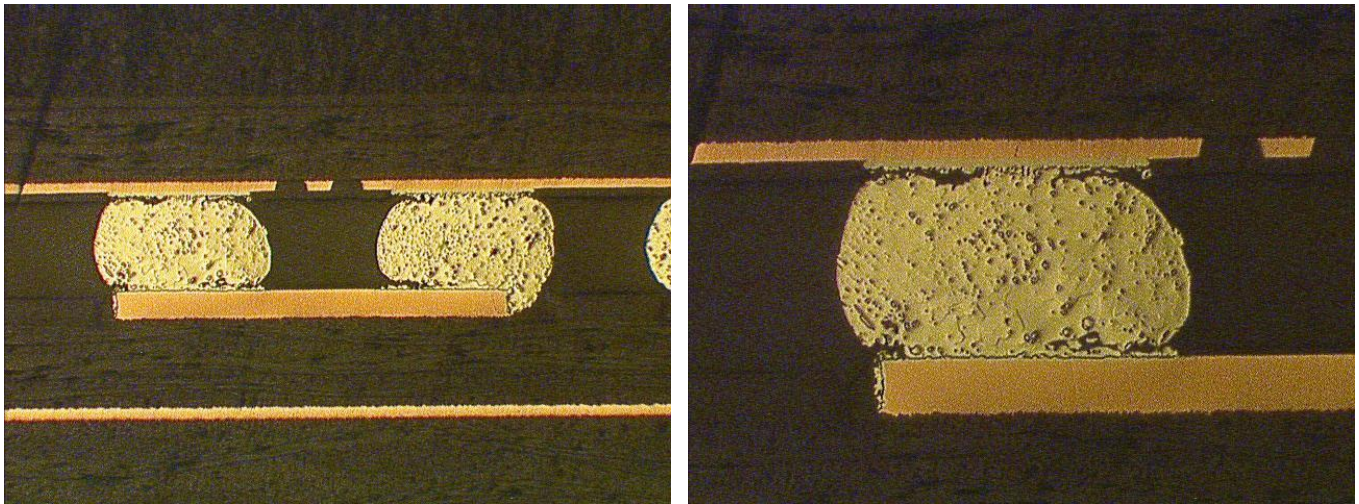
Reworked CSP-100 Solder Joints, Board 168, Component U19, Initially SAC305/SAC105, 1 rework Flux Only/SAC105, DNF
